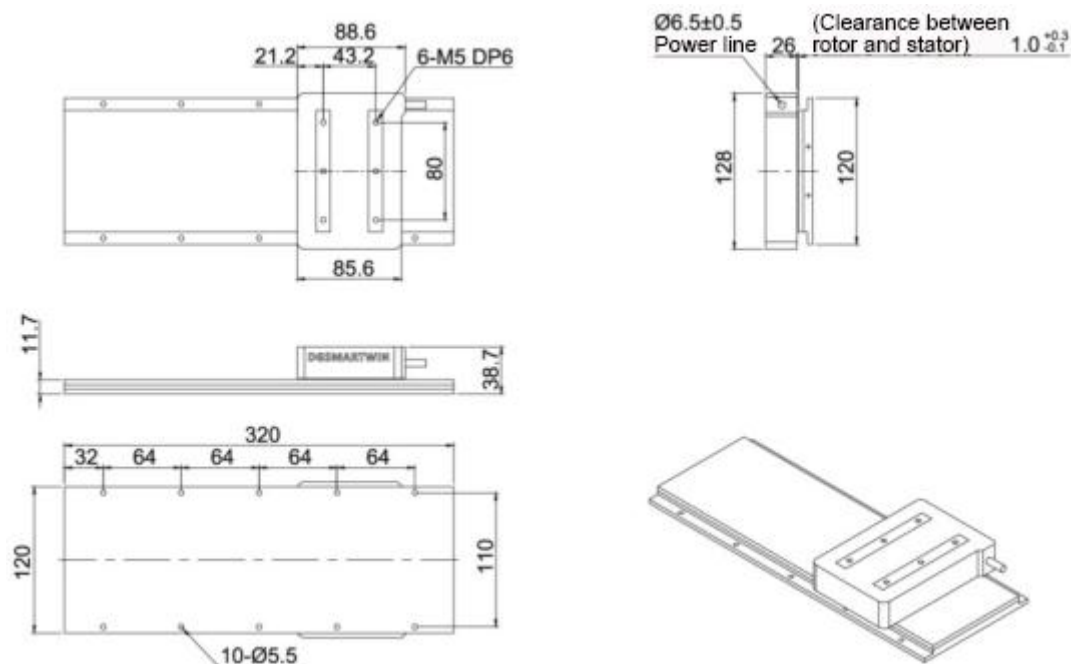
Dimensional drawing of WZCR-AZ120C1-□ motor
